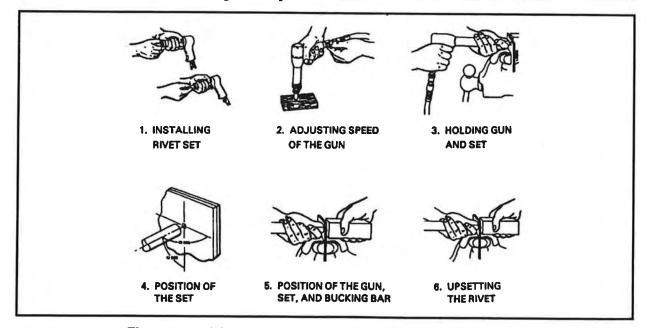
Riveting procedures using a pneumatic rivet gun
